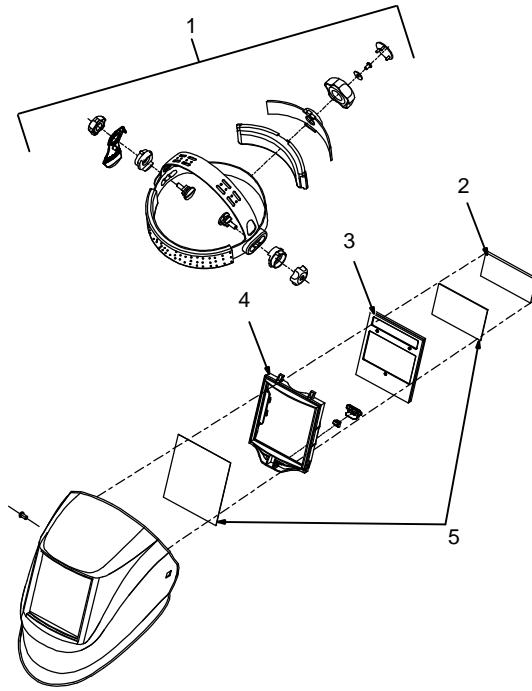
Creator Series Auto-Darkening Welding Helmet
